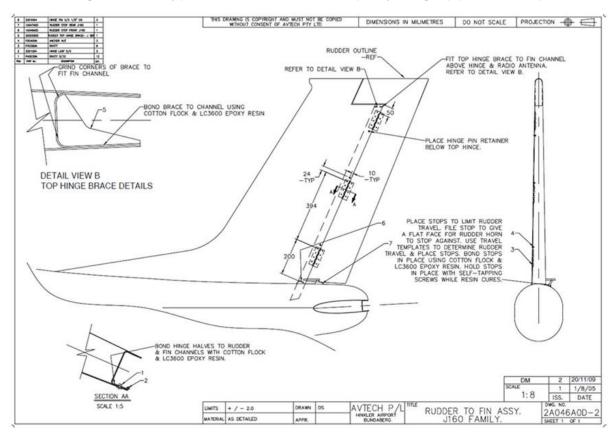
Typical Rudder Installation (Steel Hinges) (all J-Series)
